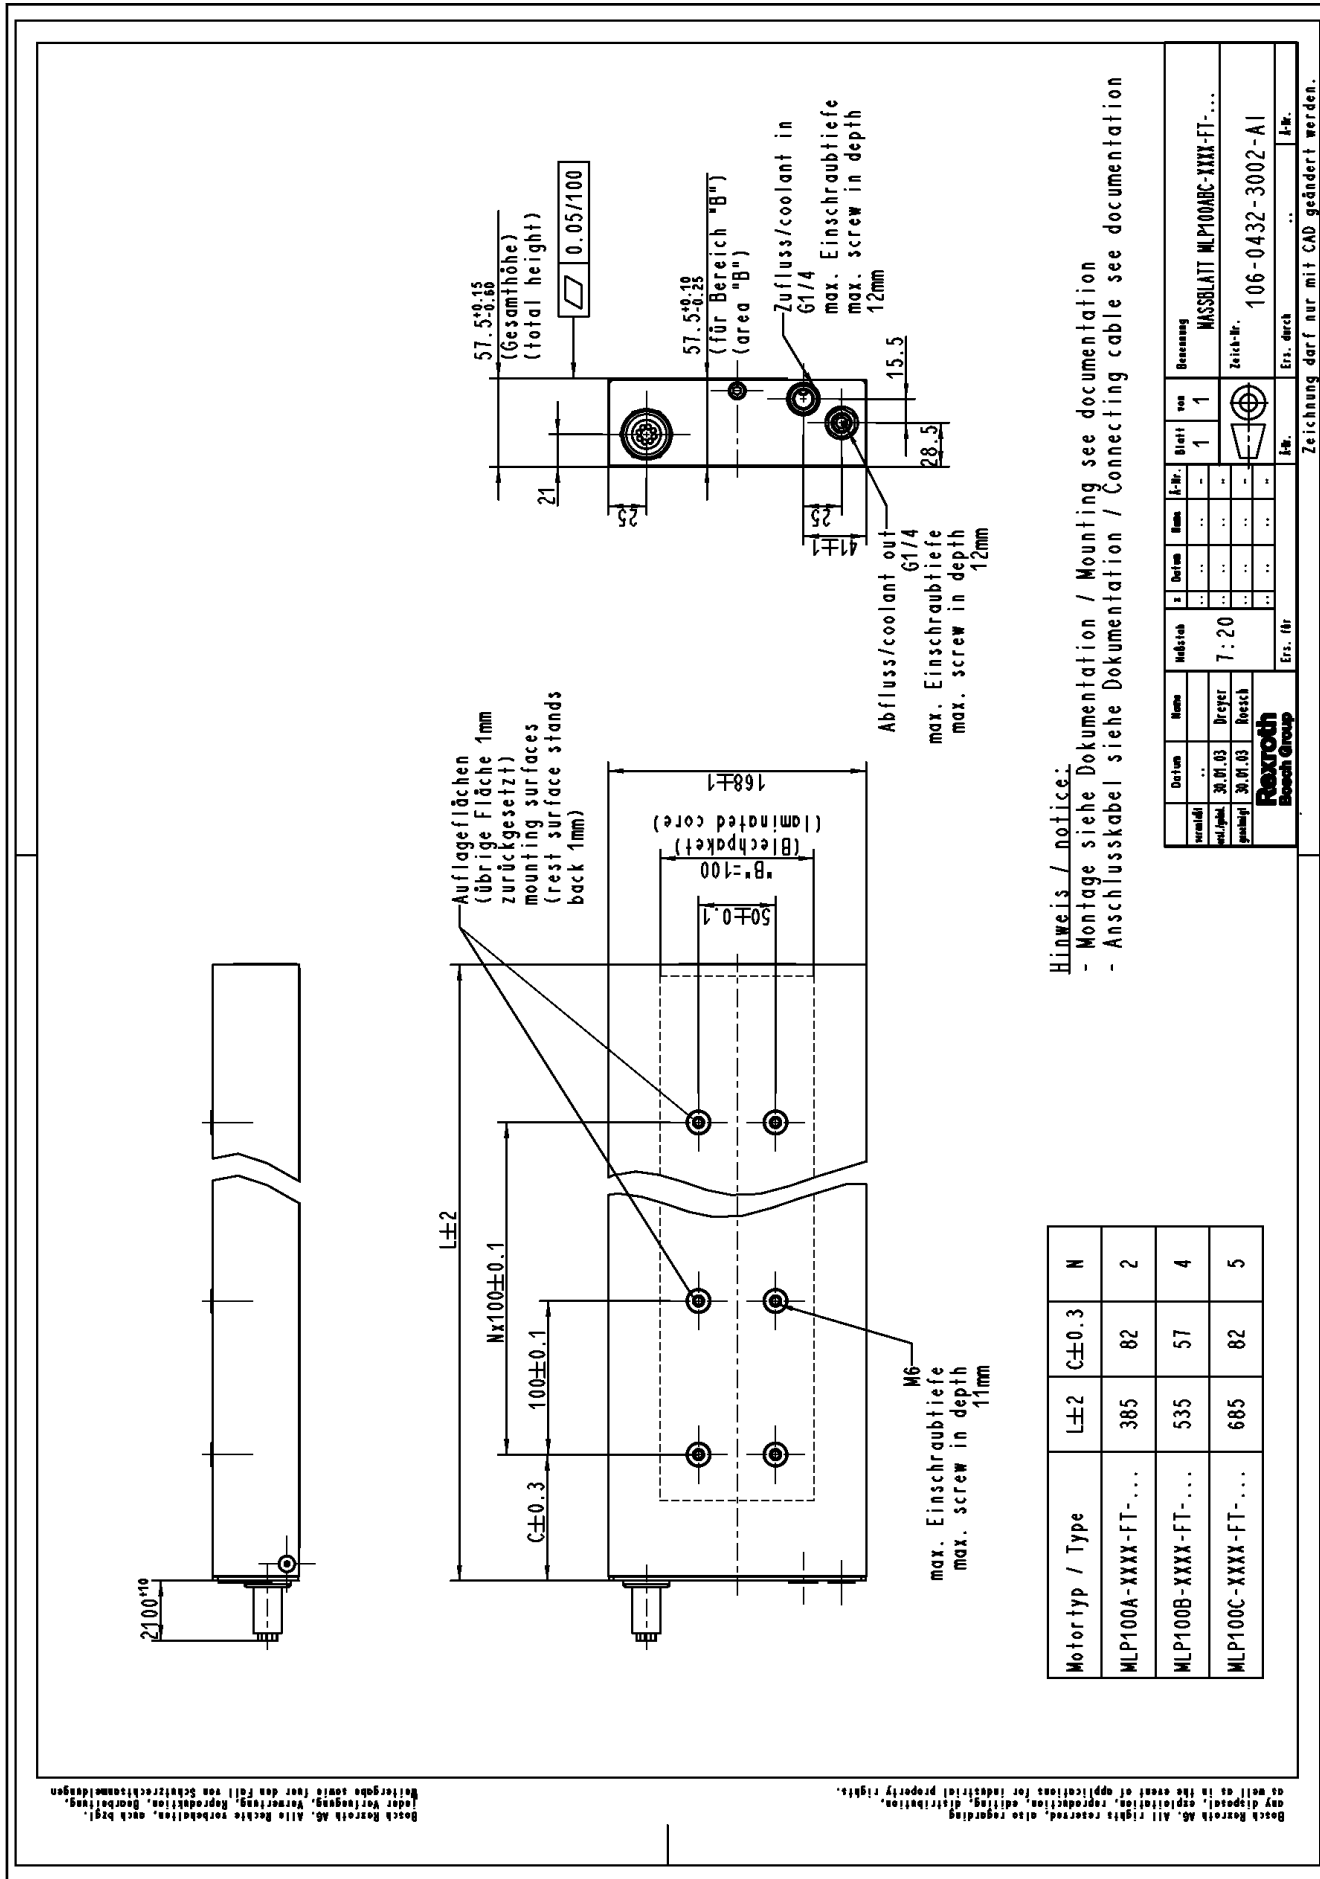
Primary Part MLP100 with Thermo Encapsulation
